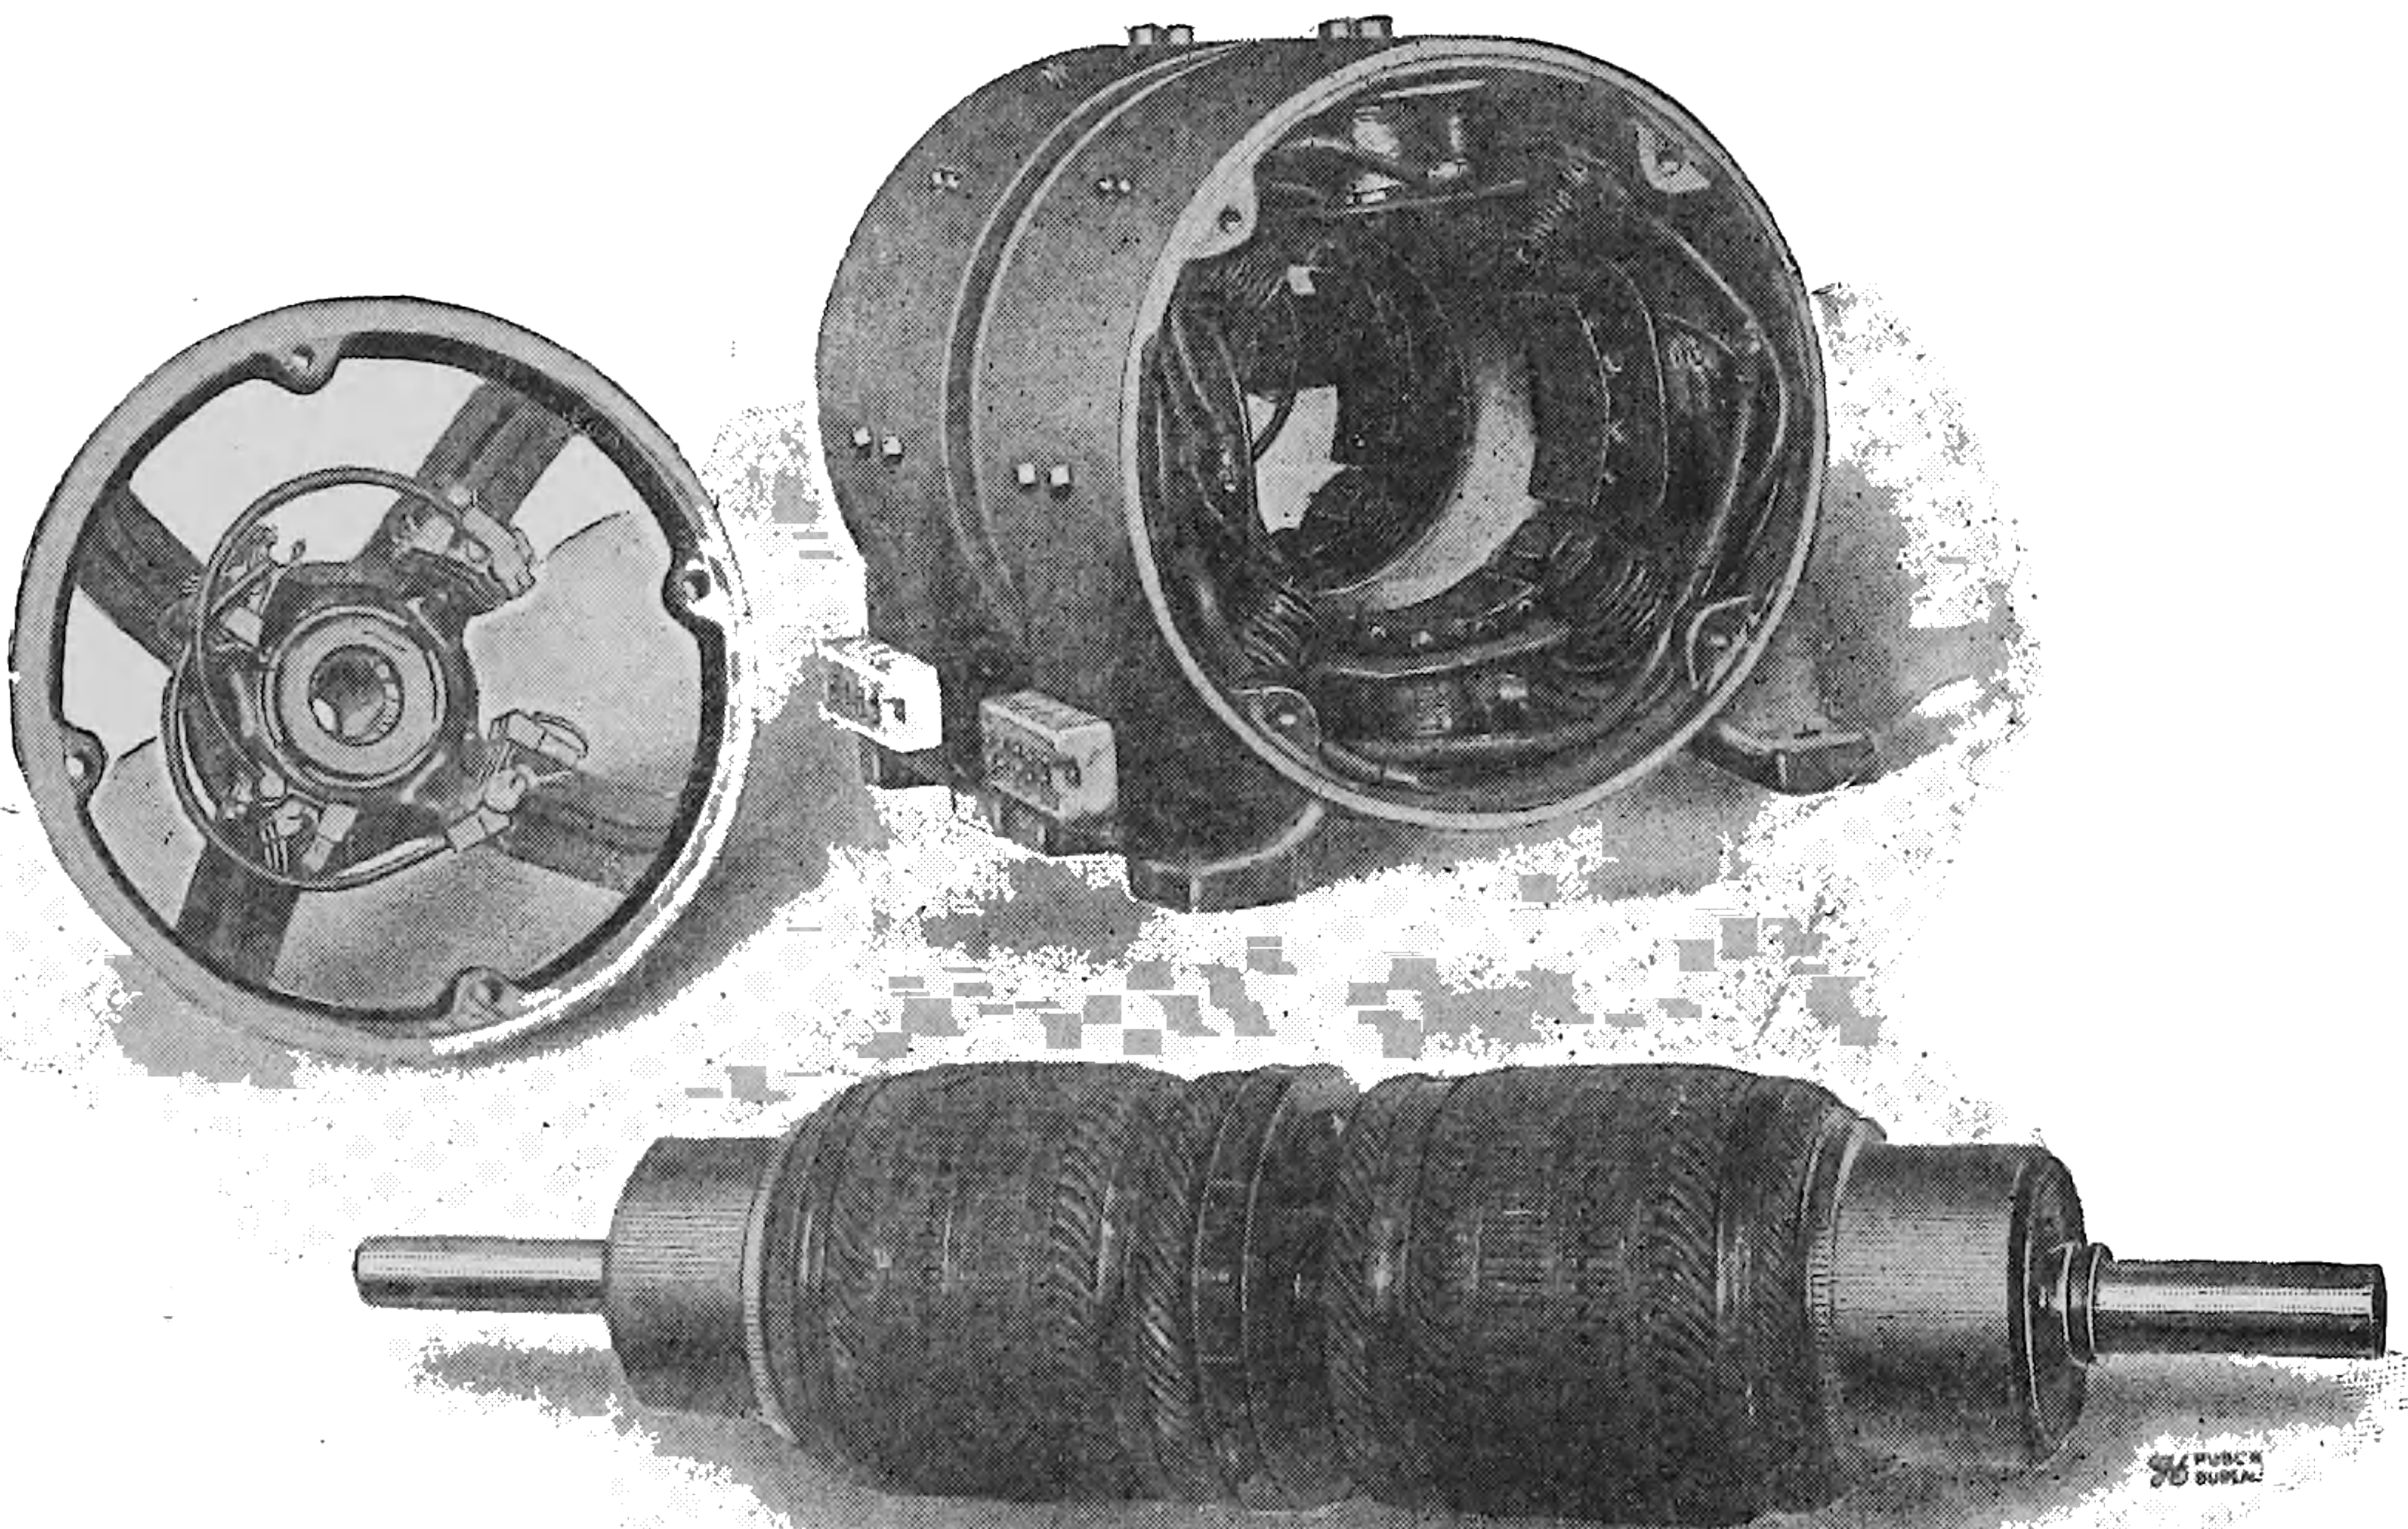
View of Disassembled General Electric Balancer set with Single Shaft
